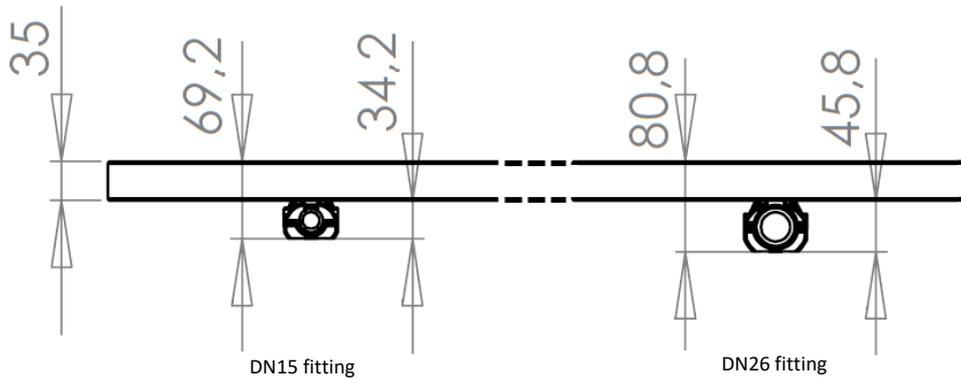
Overall dimensions of hydraulic connections on the rear panel
